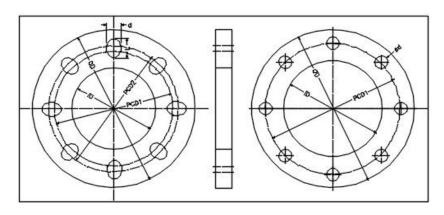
HDPE/PP SOLID FLANGES (PCD-1 AND PCD-2 TYPE)
